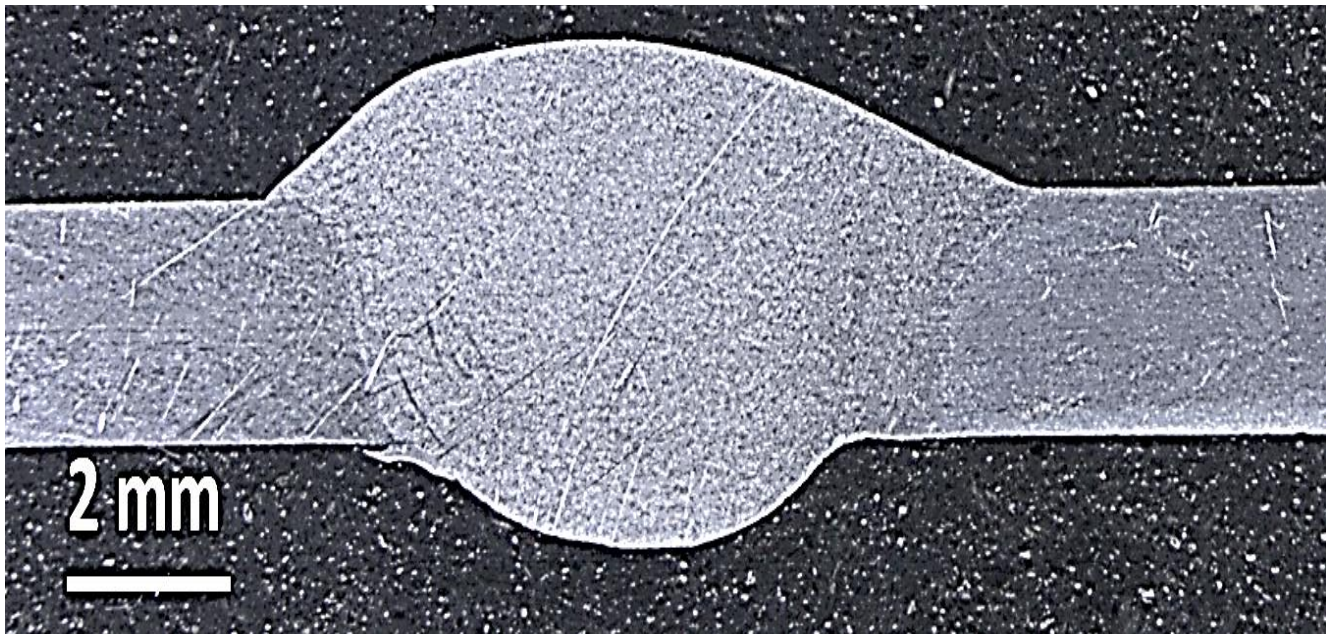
Macrostructure of transverse section of the TIG welded A6061 and A6082 joint using ER5356
